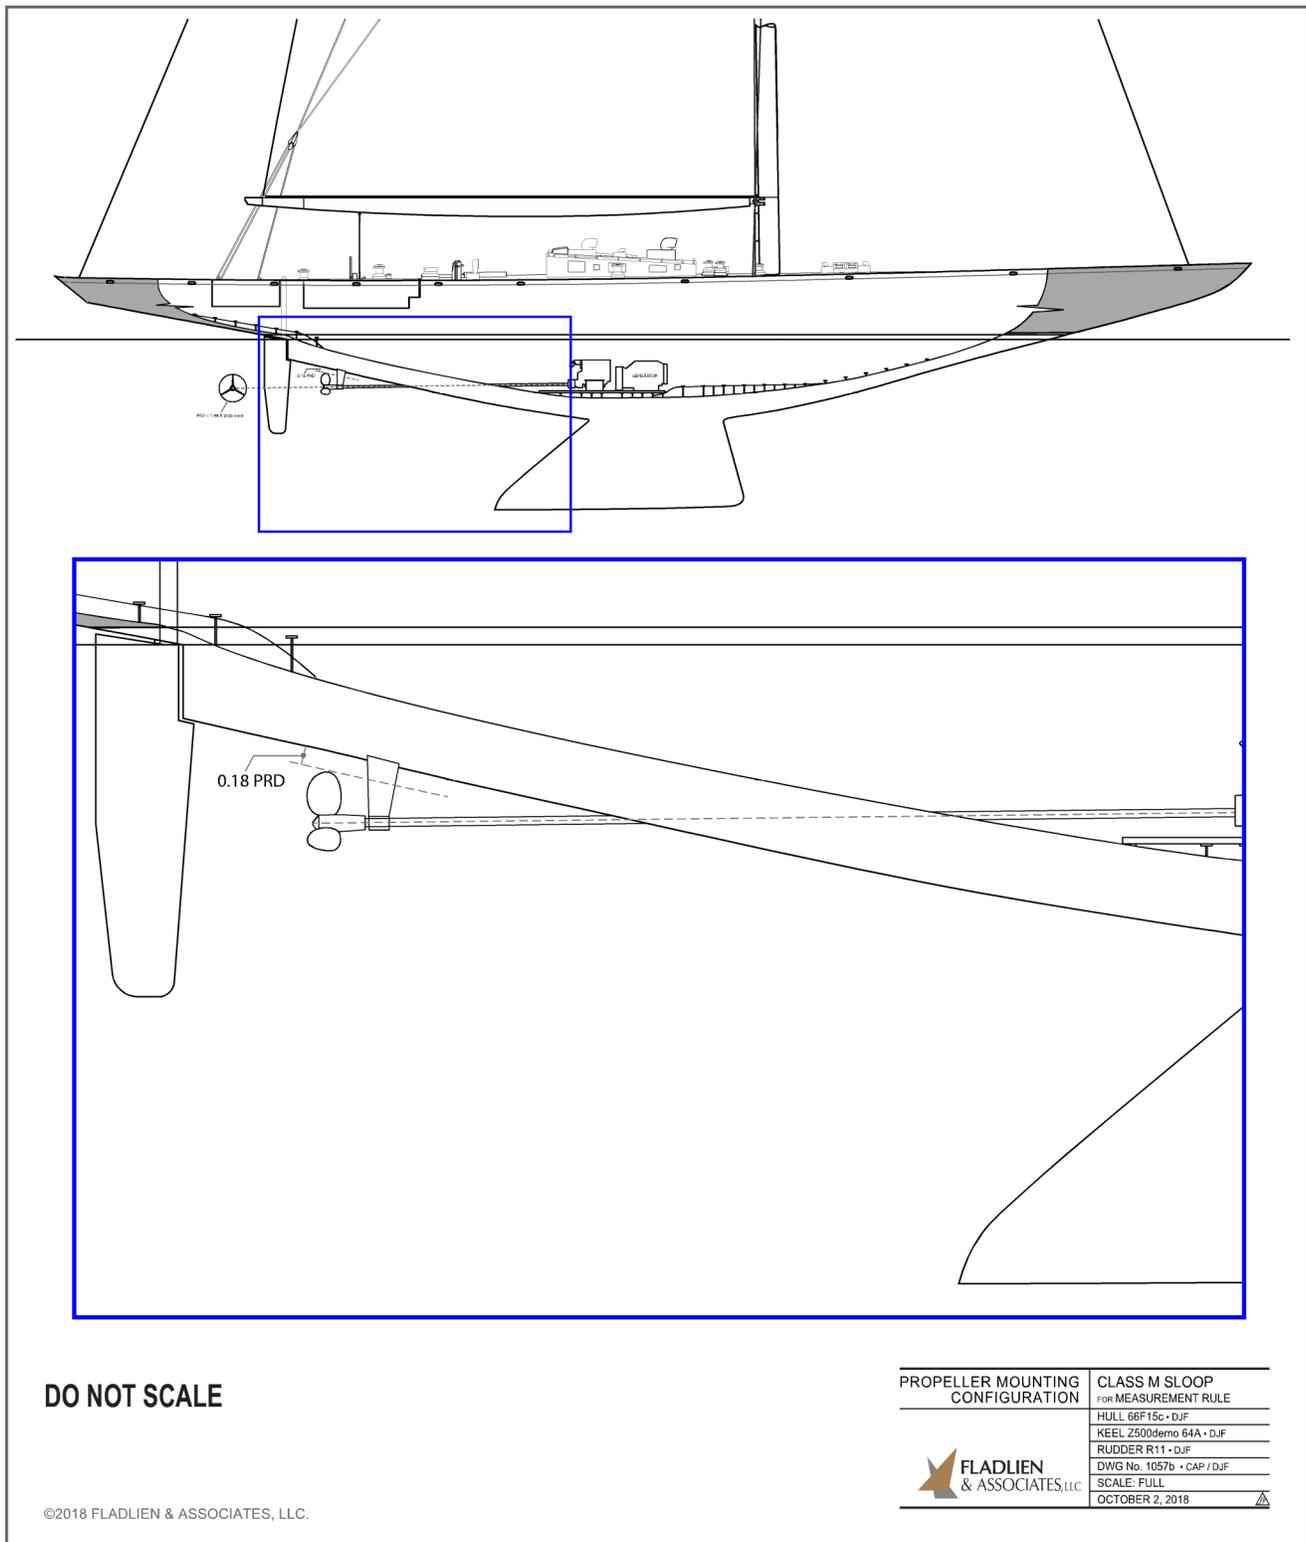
PROPELLER MOUNTING CONFIGURATION
